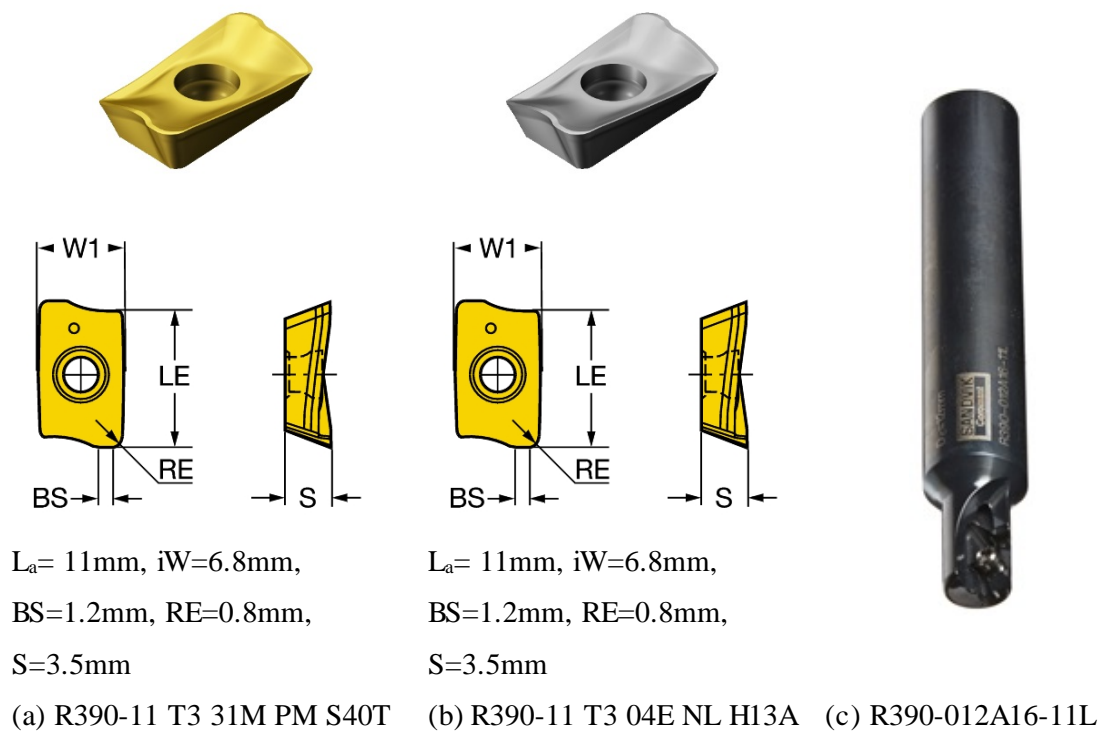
Cutting inserts geometry (a, b) and tool holder (c)
